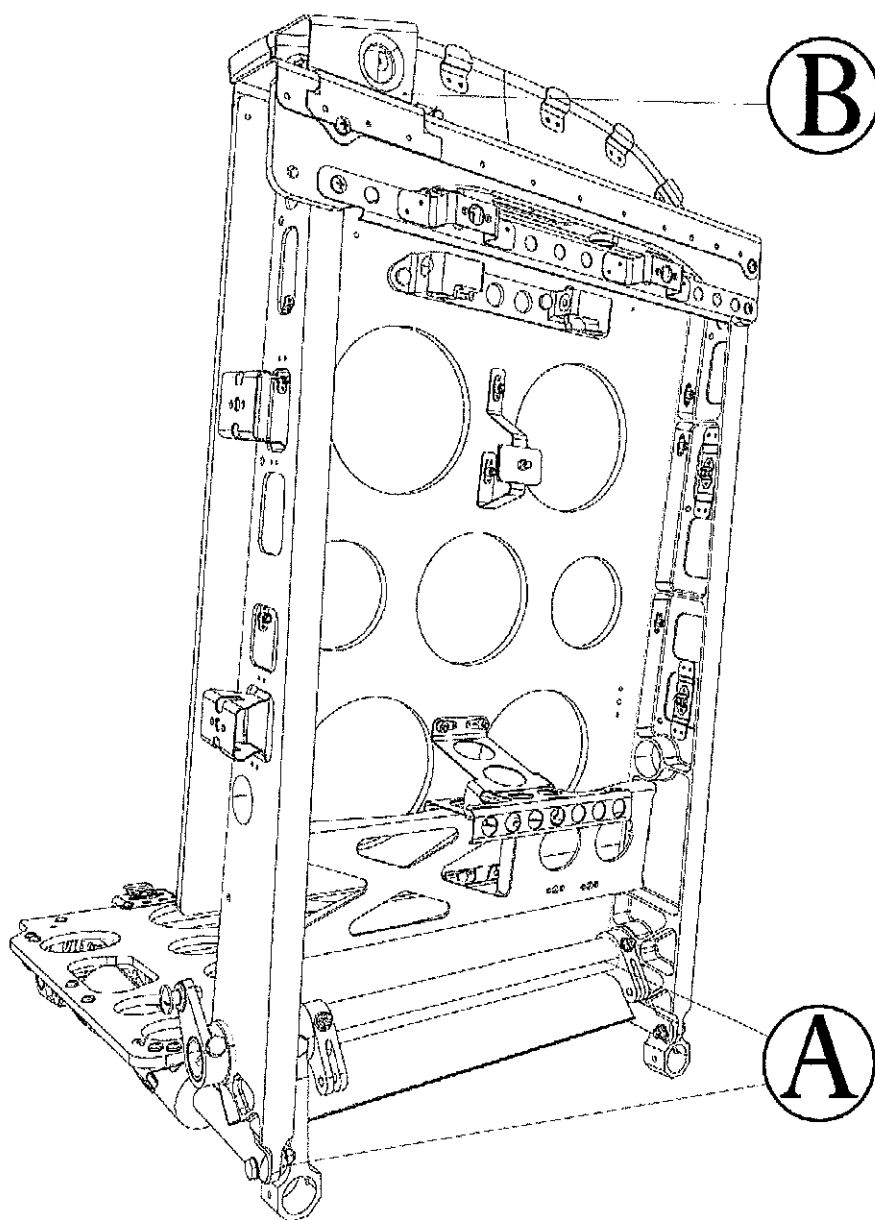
SHEET 1 UPPER SEAT ASSEMBLY
